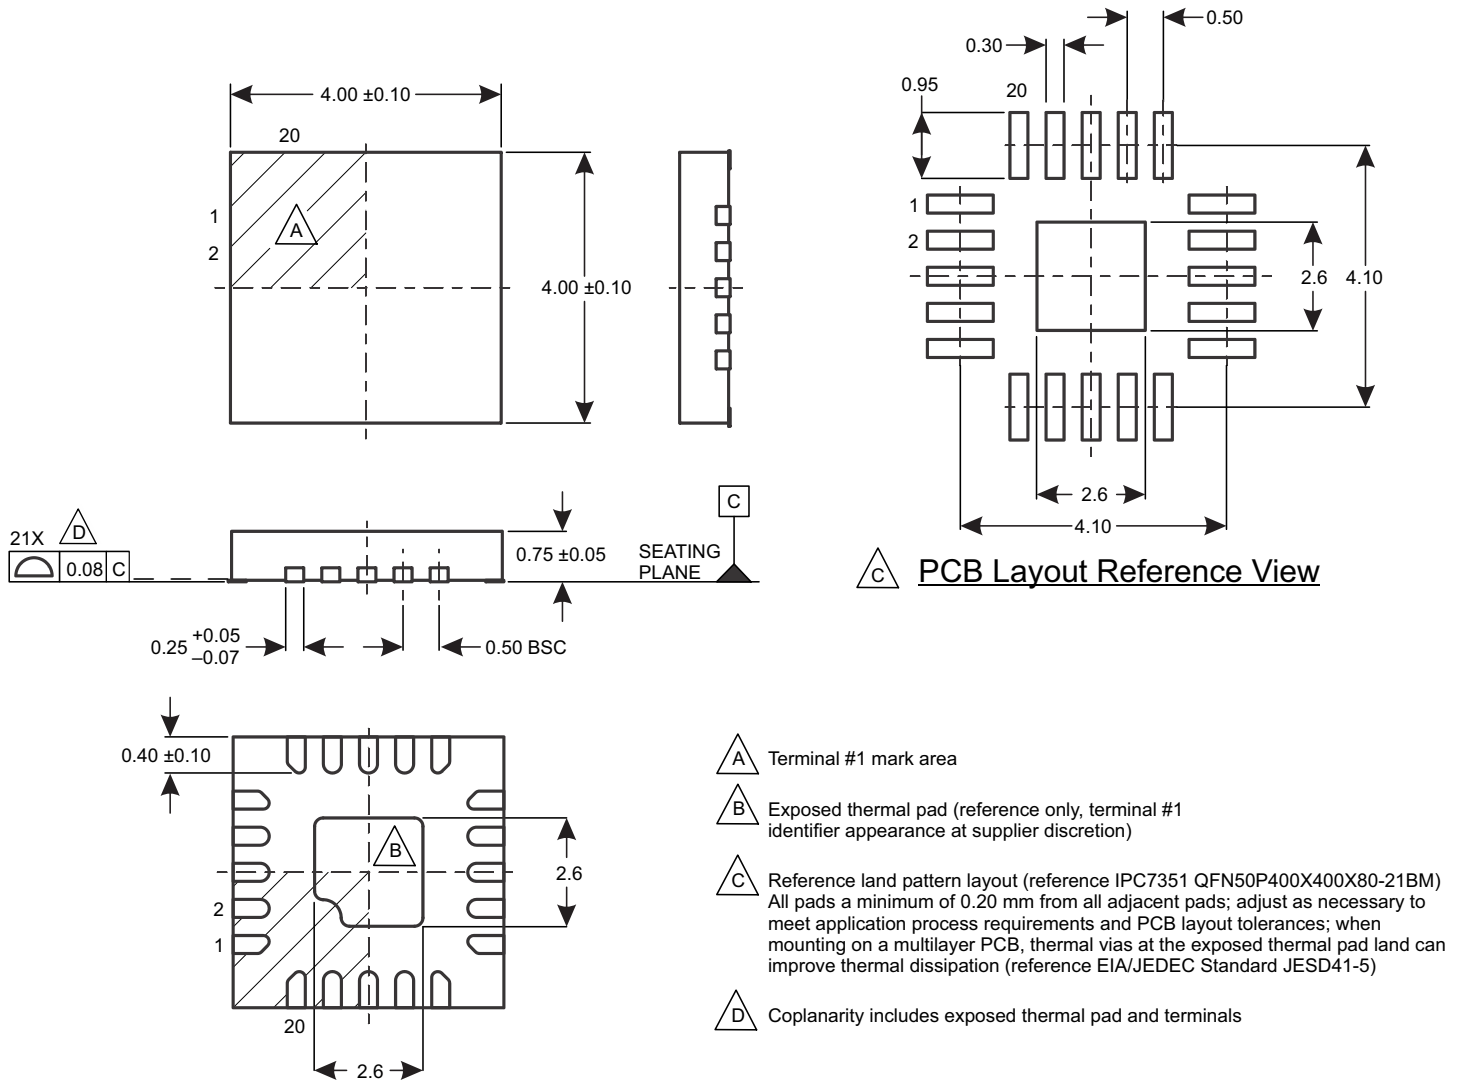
Package ES, 20-Pin QFN with Exposed Thermal Pad
